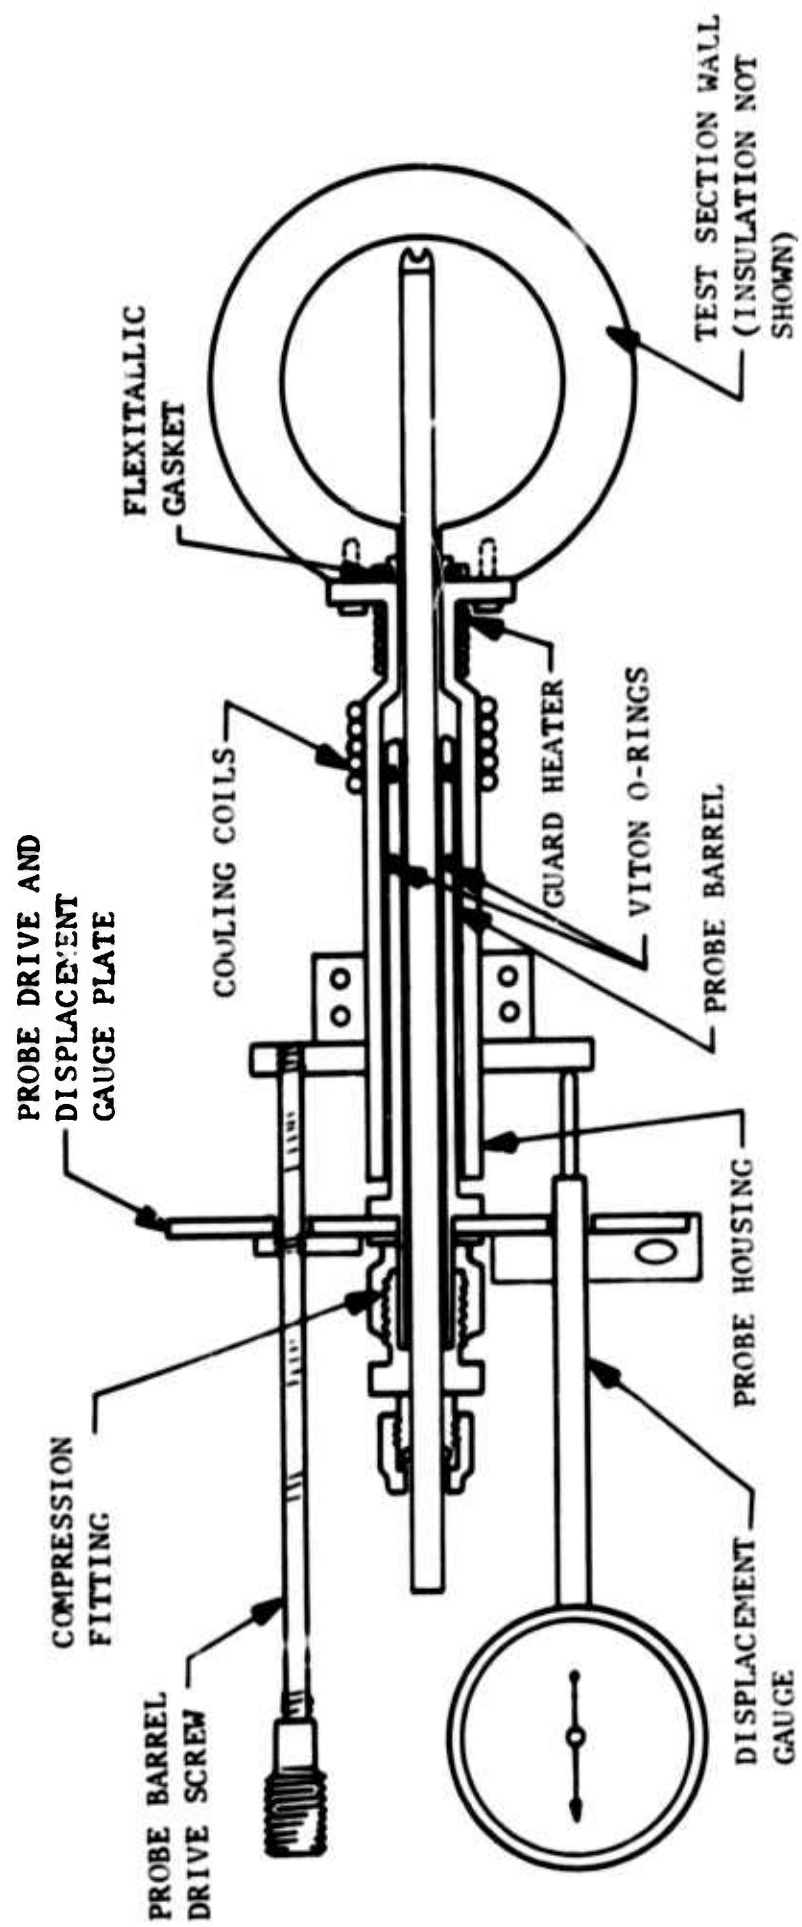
PROBE HOLDER ASSEMBLY (PROBE FULLY INSERTED)
